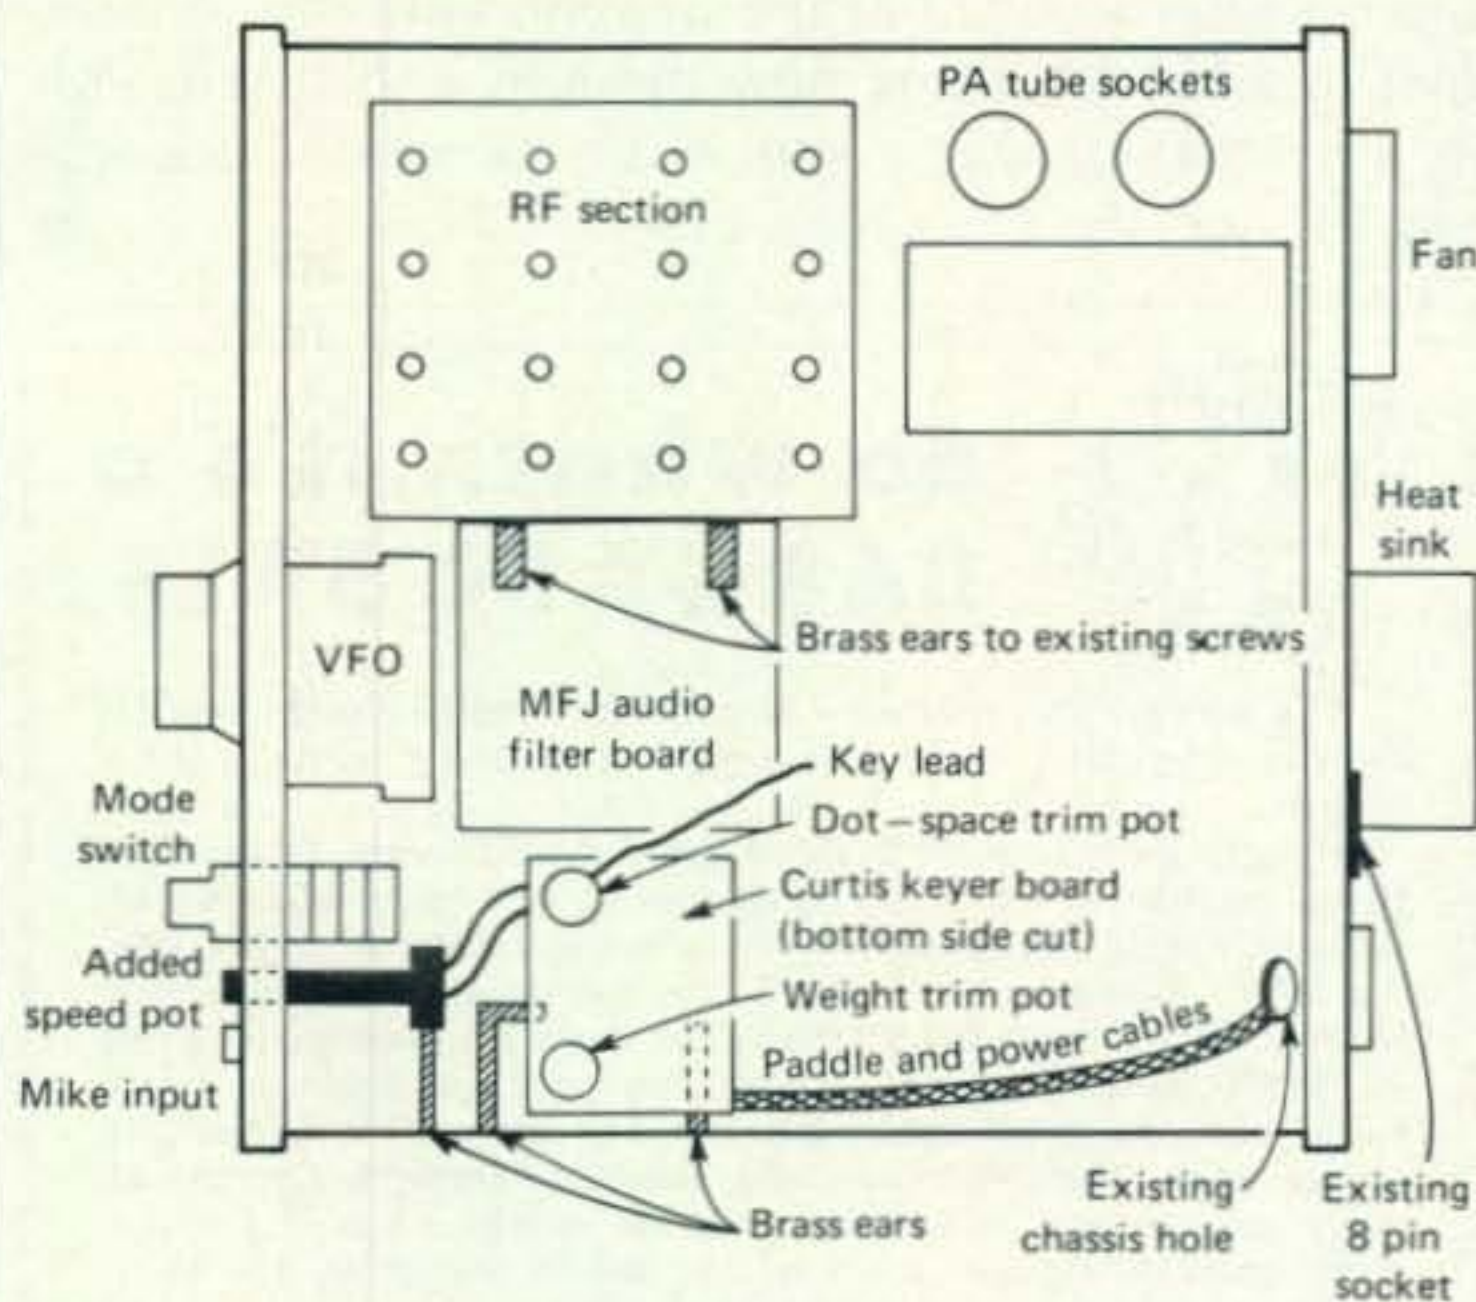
Bottom view of the Kenwood TS-520 transceiver showing the locations of the MFJ audio filter and Curtis IC keyer PC board.
